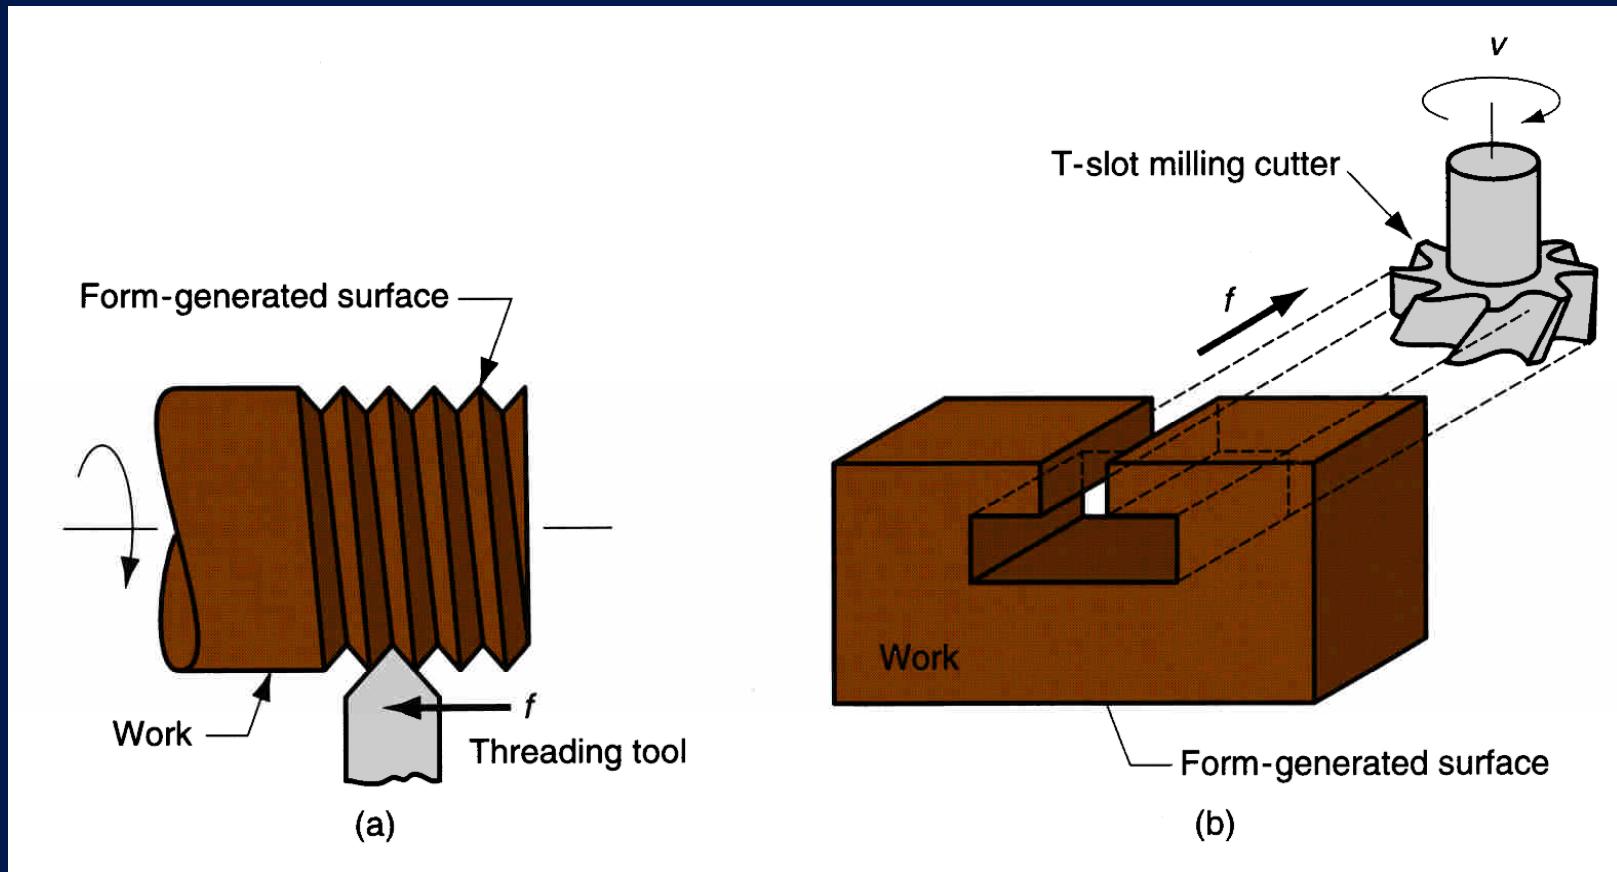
Combination of forming and generating to create shape: (a) thread cutting on a lathe, and (b) slot milling
